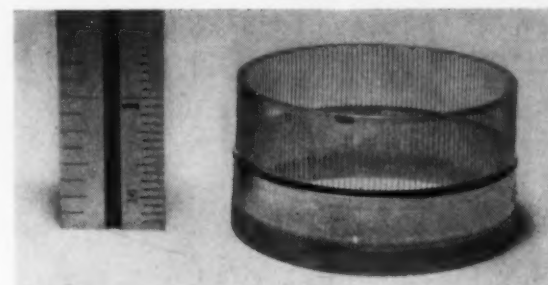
Exact shape and alignment are maintained with only a light connecting ring. Structure is possible because of weak, uniform residual stress pattern.
